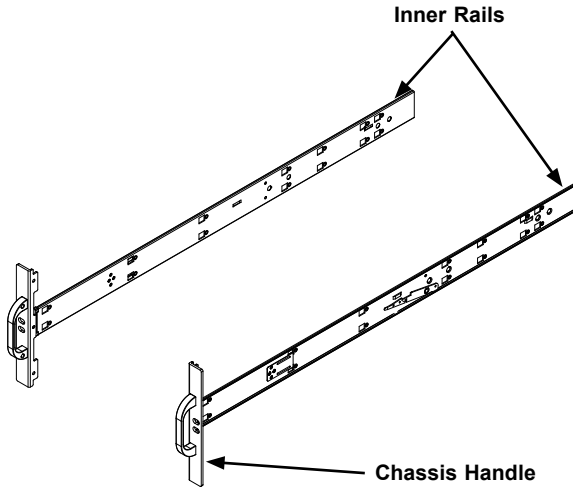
Identifying the Inner Rails and Chassis Handles
